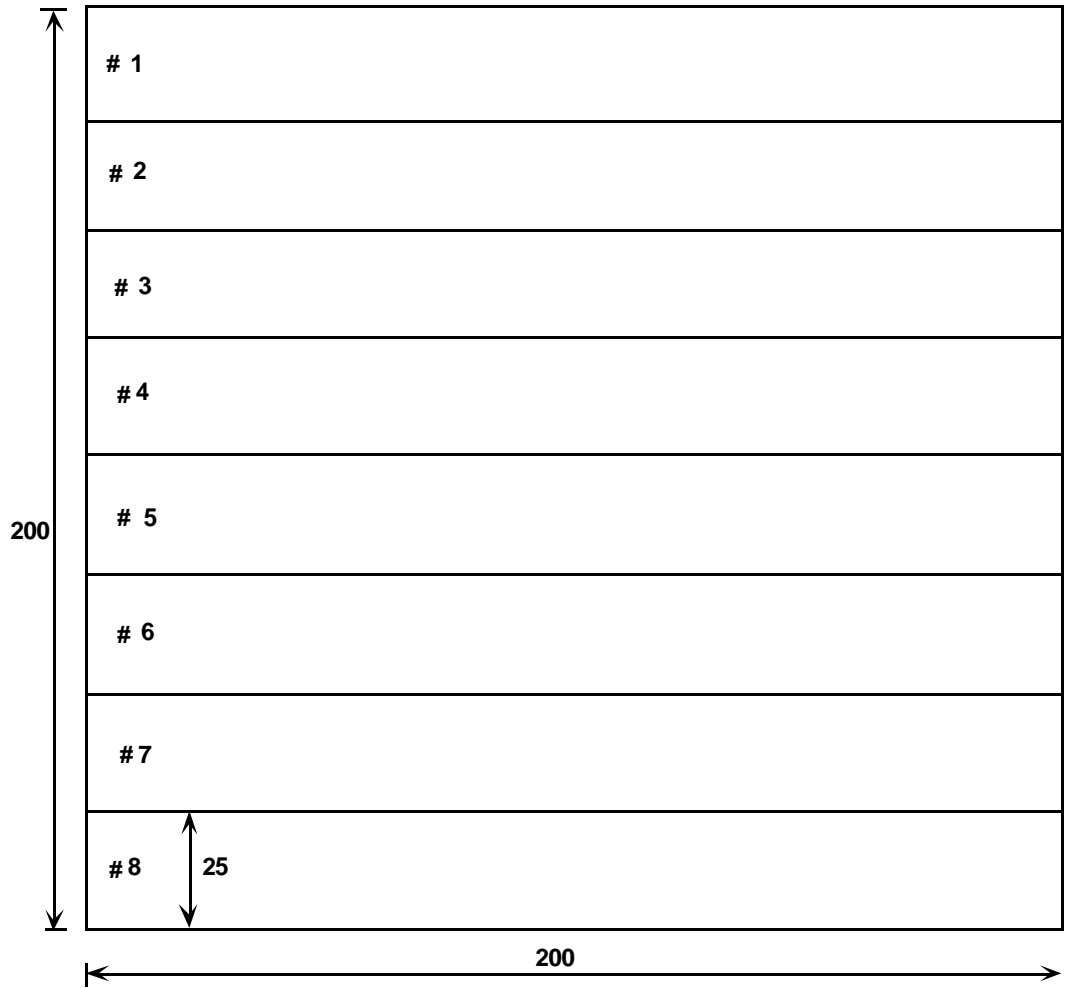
Typical layout of a bonded panel from which DCB specimens are machined. Dimensions are in millimeters.
